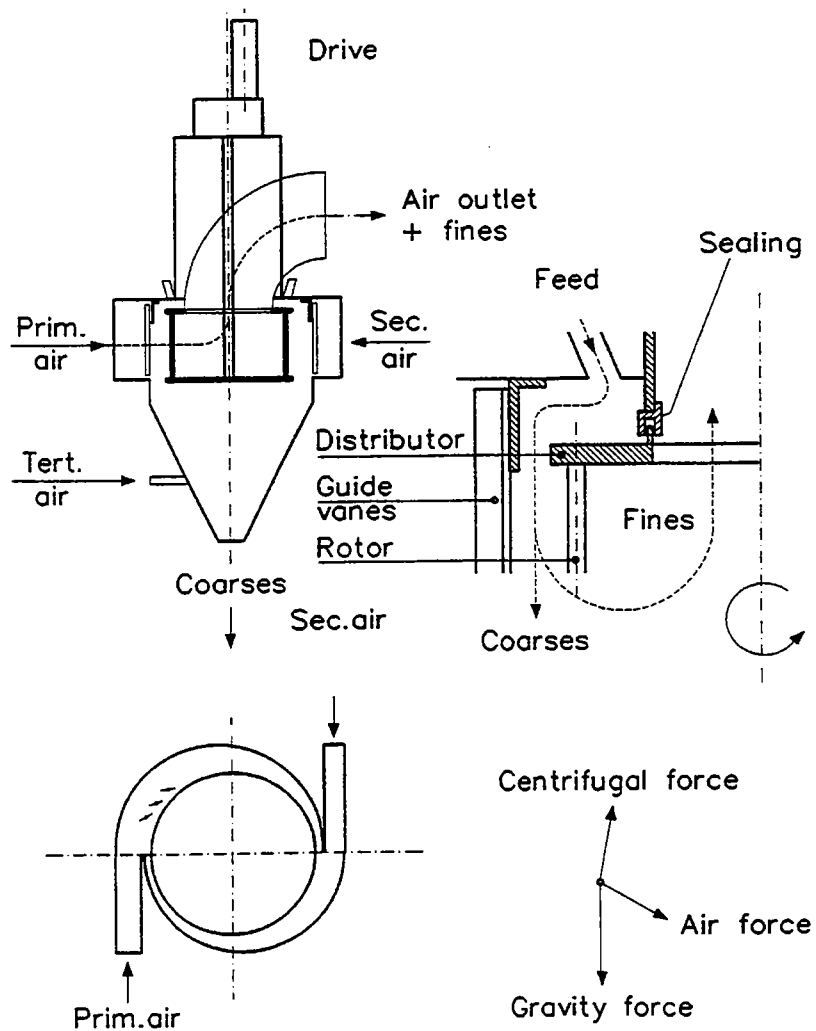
Polysius Sepol (Rotor Type Separator, Makes)
